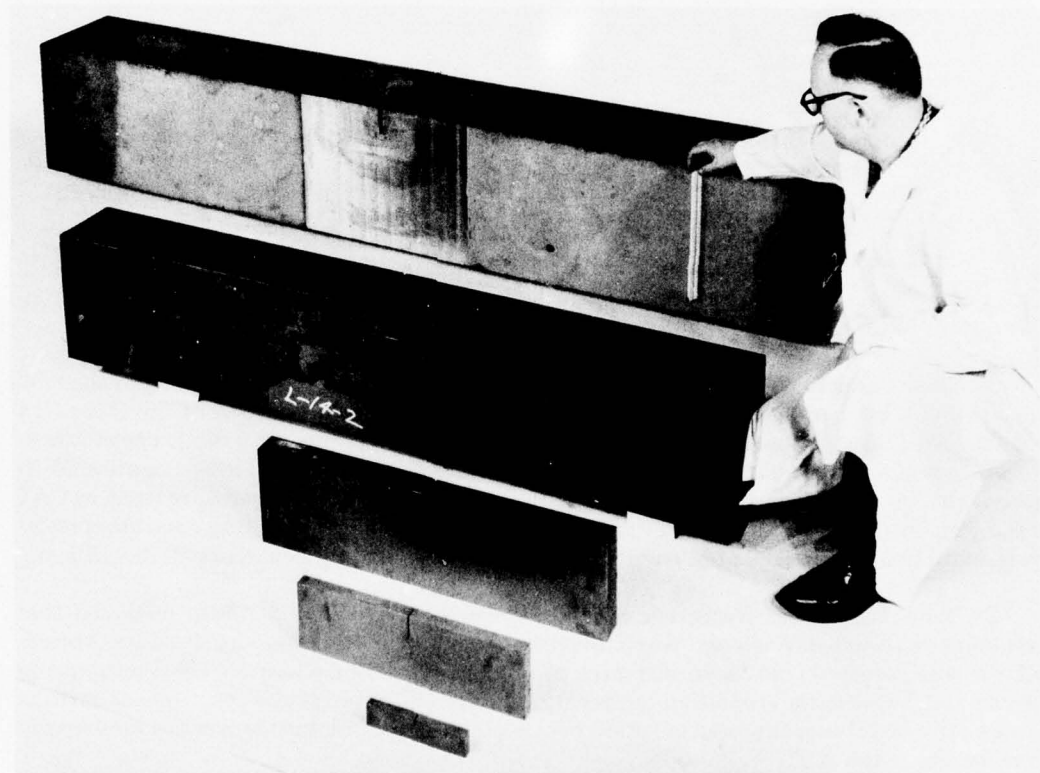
Range of DT test specimens used for size-effect studies. All specimens have the brittle electron-beam weld crack starter.
